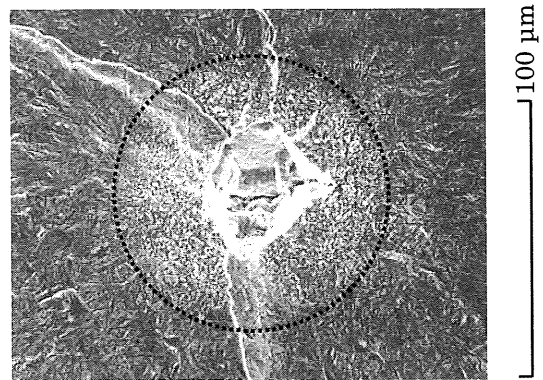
ODA, typical fracture surface observed around origin of sub-surface fracture.
